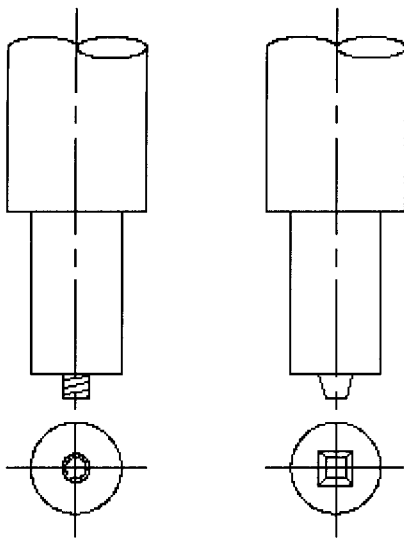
Typical weld tool and process parameters used in the FSW process
